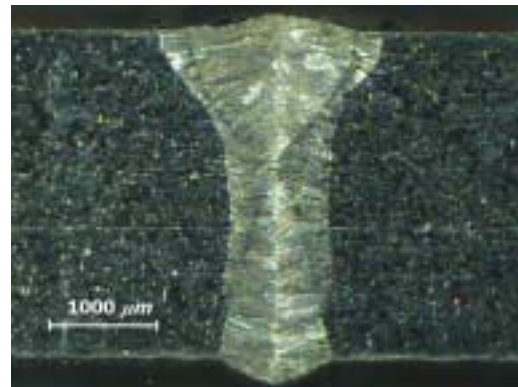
Cross-sectional area of bead on plate welding at P=1.5kW, v=1.0m/min and z=0.5mm
